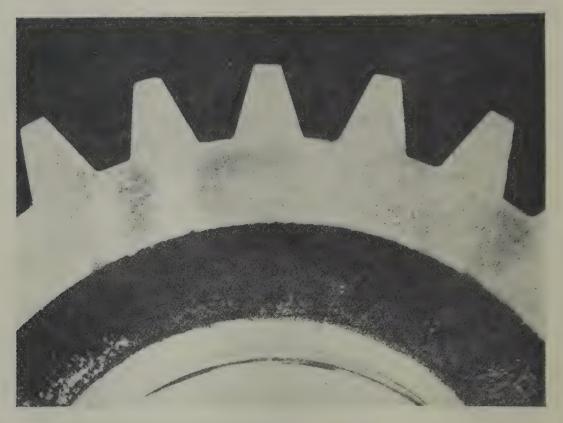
Chain sprocket cast in s.g. Iron with flame-hardened teeth
